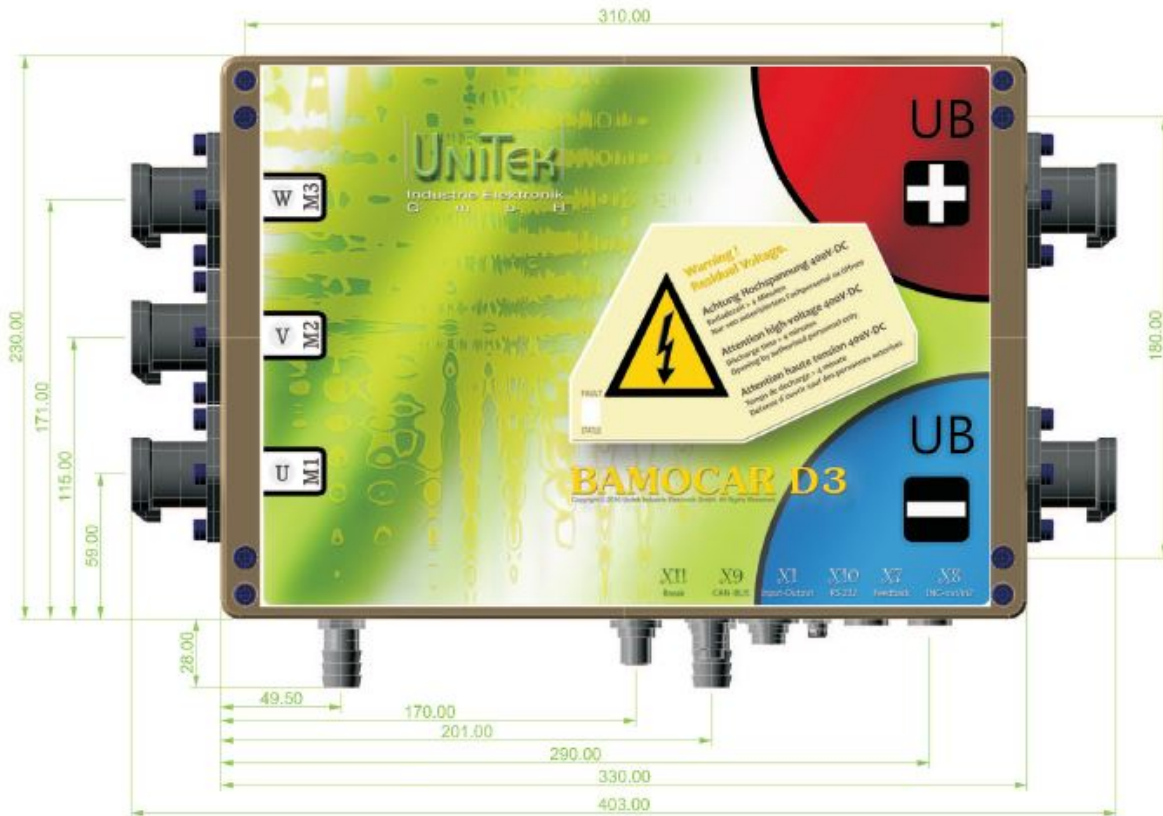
Unitek Bamocar D3 motor controller physical dimensions. Units are in *mm*.
